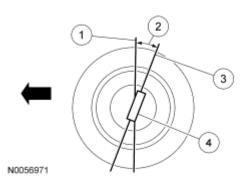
Locating Crankshaft Timing Chain Sprocket Courtesy of FORD MOTOR CO.
